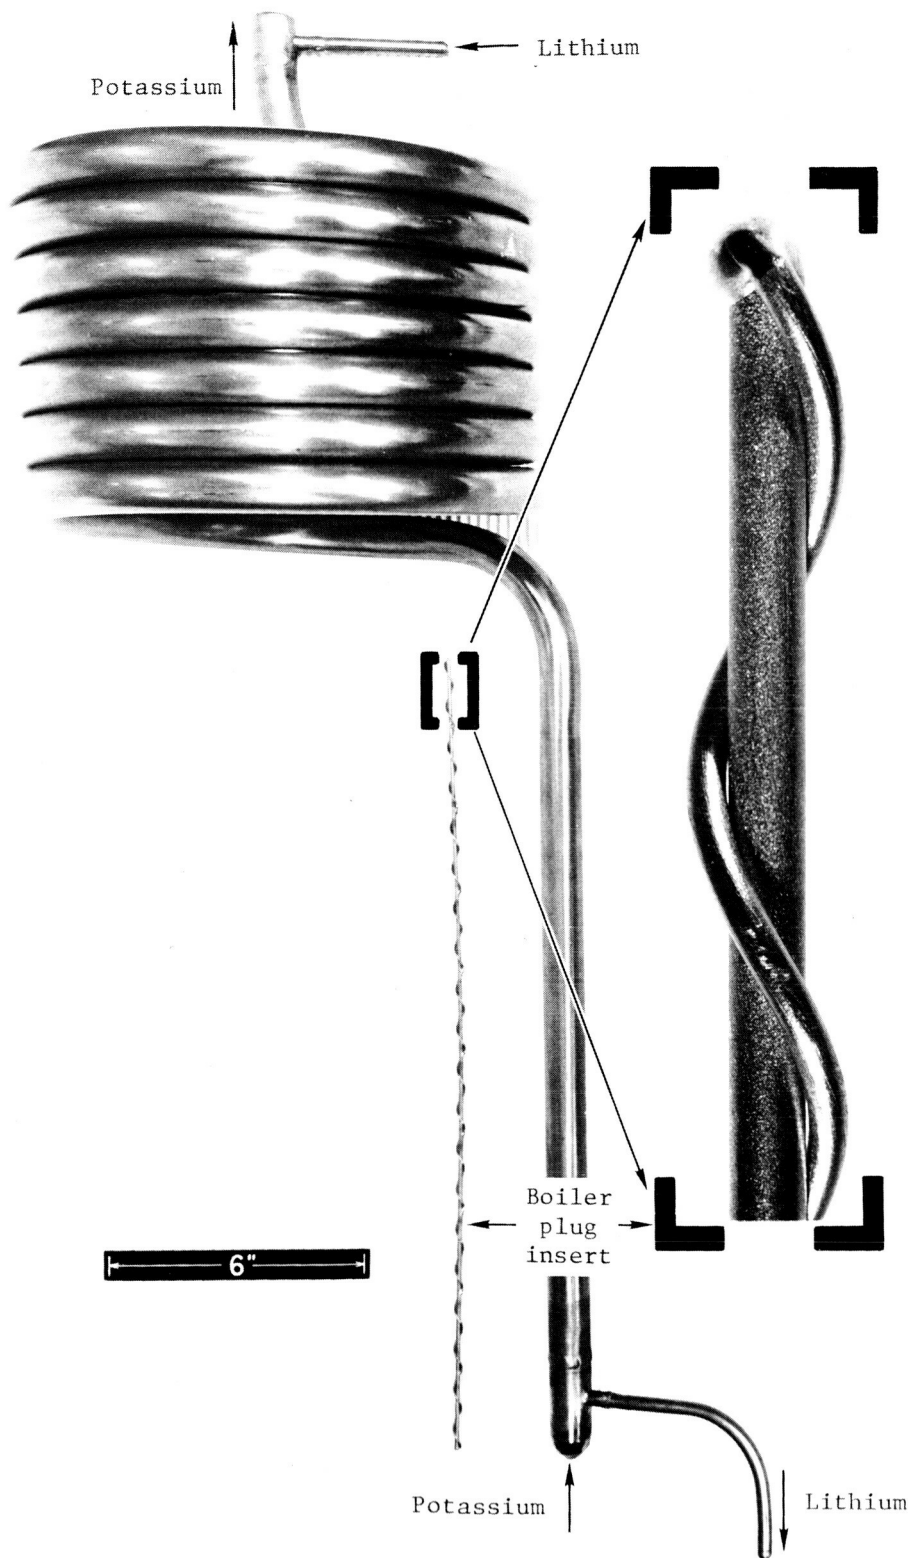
Tube-in-tube boiler of corrosion loop 1 (T-111) prior to insertion of boiler plug.
